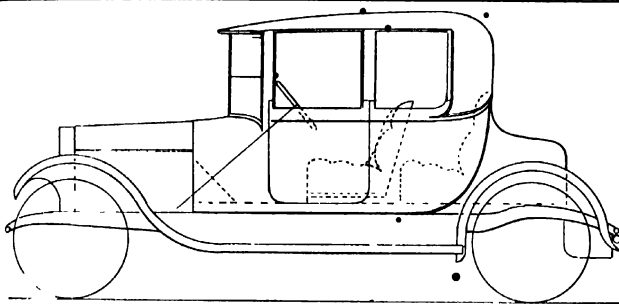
Sectional Elevation of Clover-leaf Type Coupé with Tool Box.
